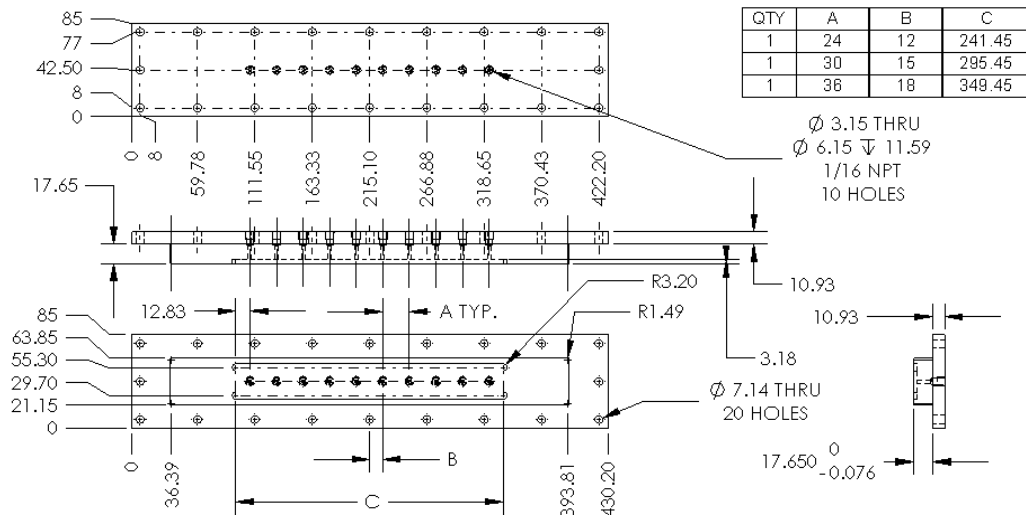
Machining Drawing for Bottom Covers, with Dimensions in millimeters
